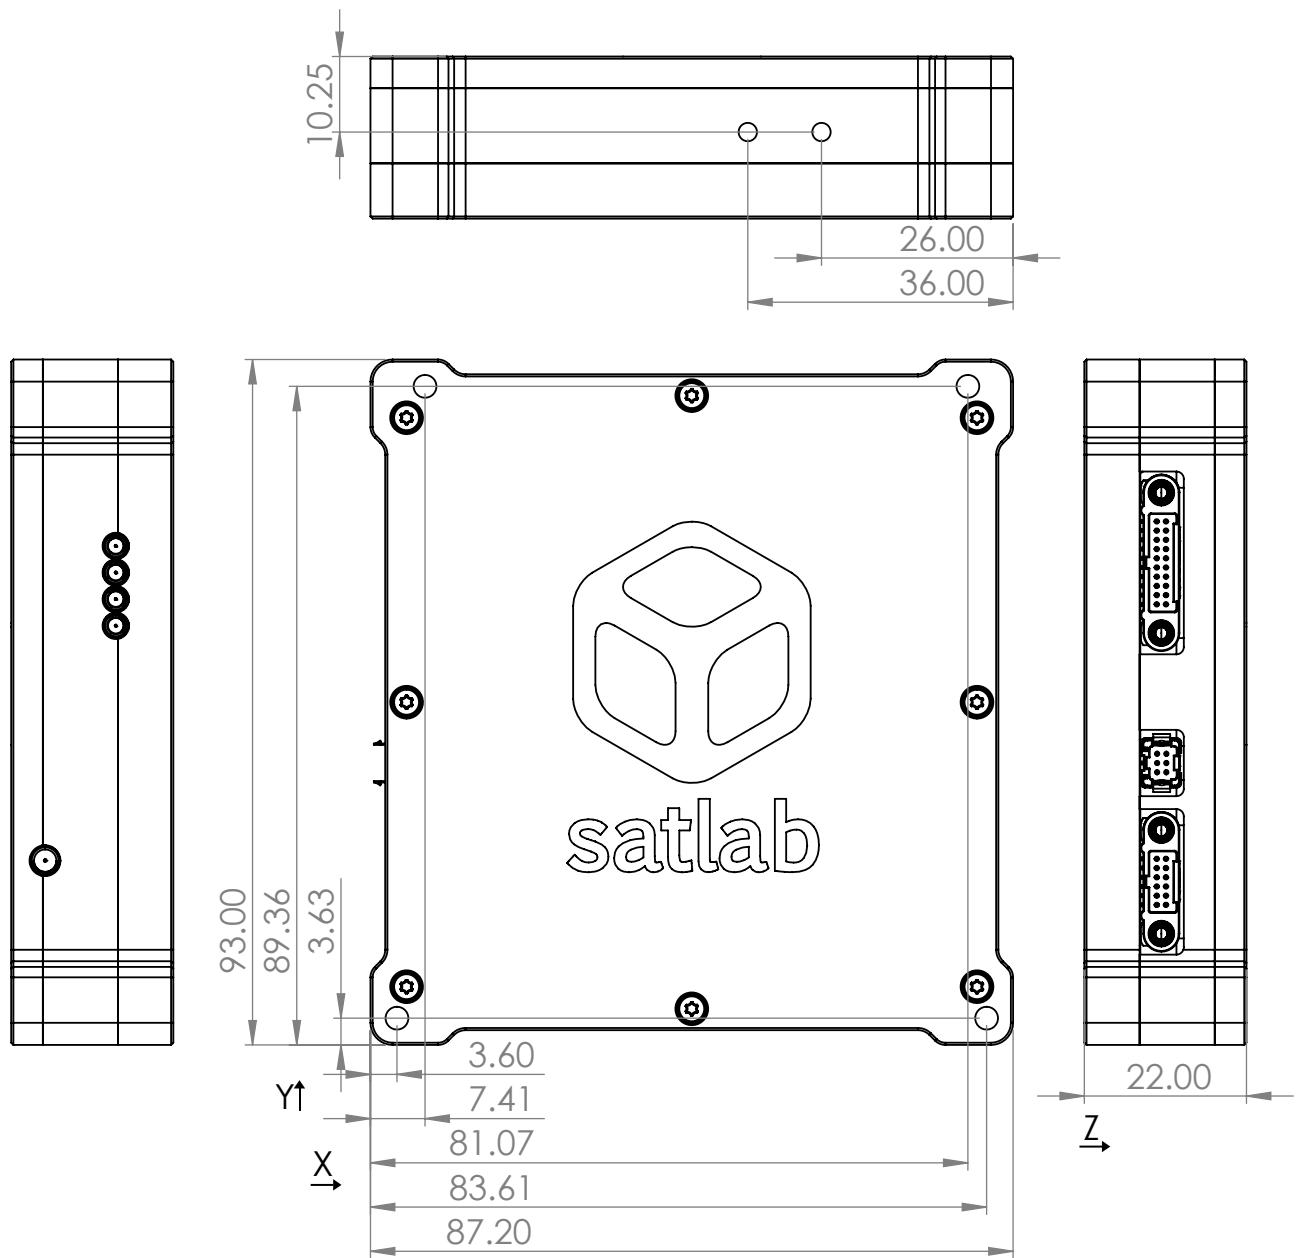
Board outline and side views showing the Z+, X+, X-, and Y- faces. All dimensions in mm with ± 0.1 mm tolerance in X and Y and ± 0.2 mm in Z.
